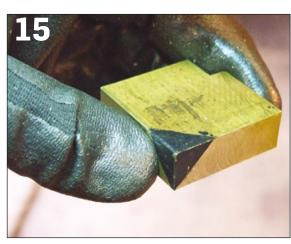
After machining of valve body blank, datum surfaces marked with felt-tip pen.
